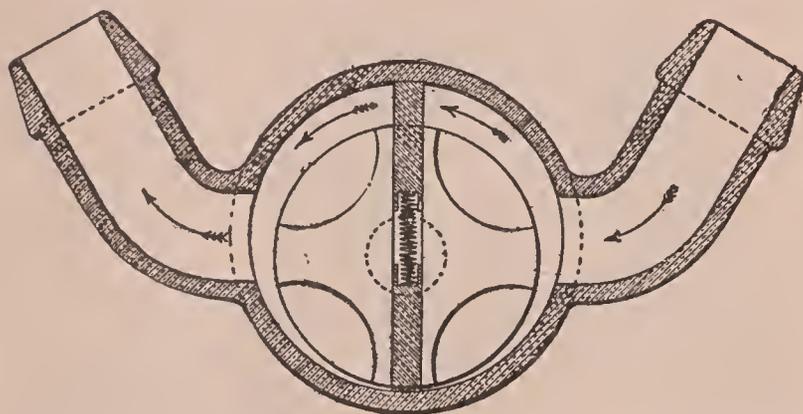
Section Through a Vane Type of Pump, Indicating the Sliding Vane in Two Parts and the Spring Which Keeps Them Separated.
